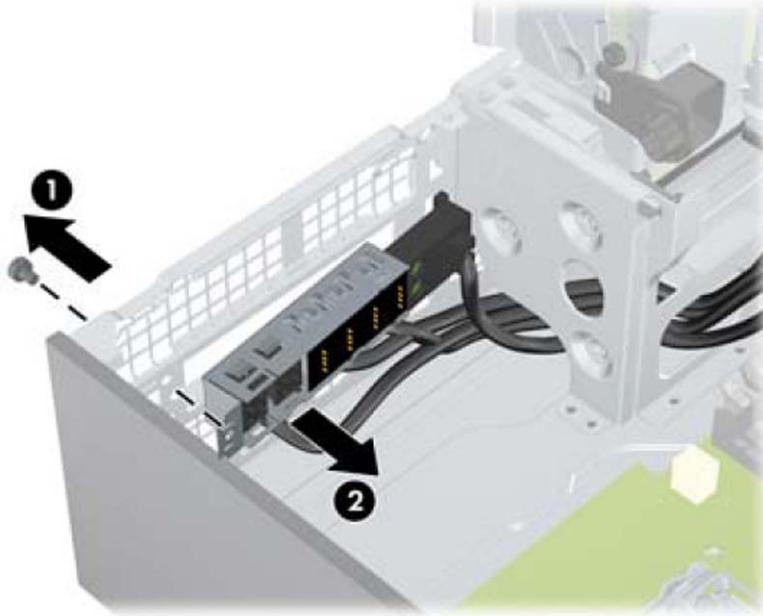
Disconnecting the front I/O, power switch/LED assembly cables
